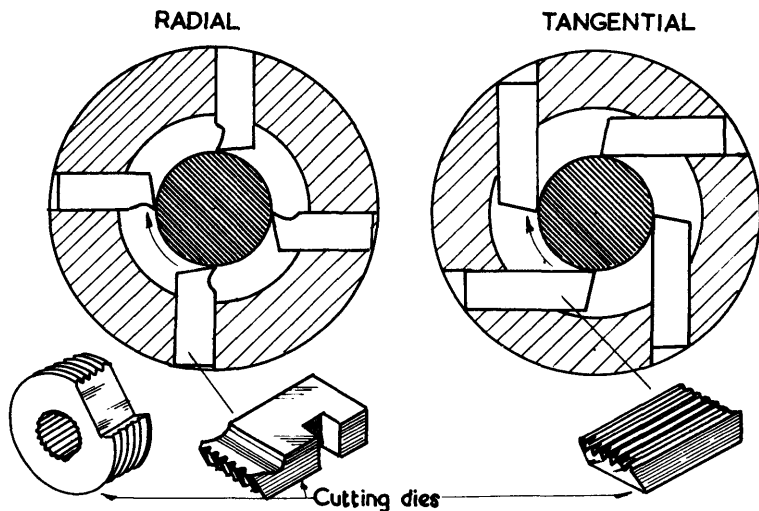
Radial and Tangential Cutting Dieheads.
